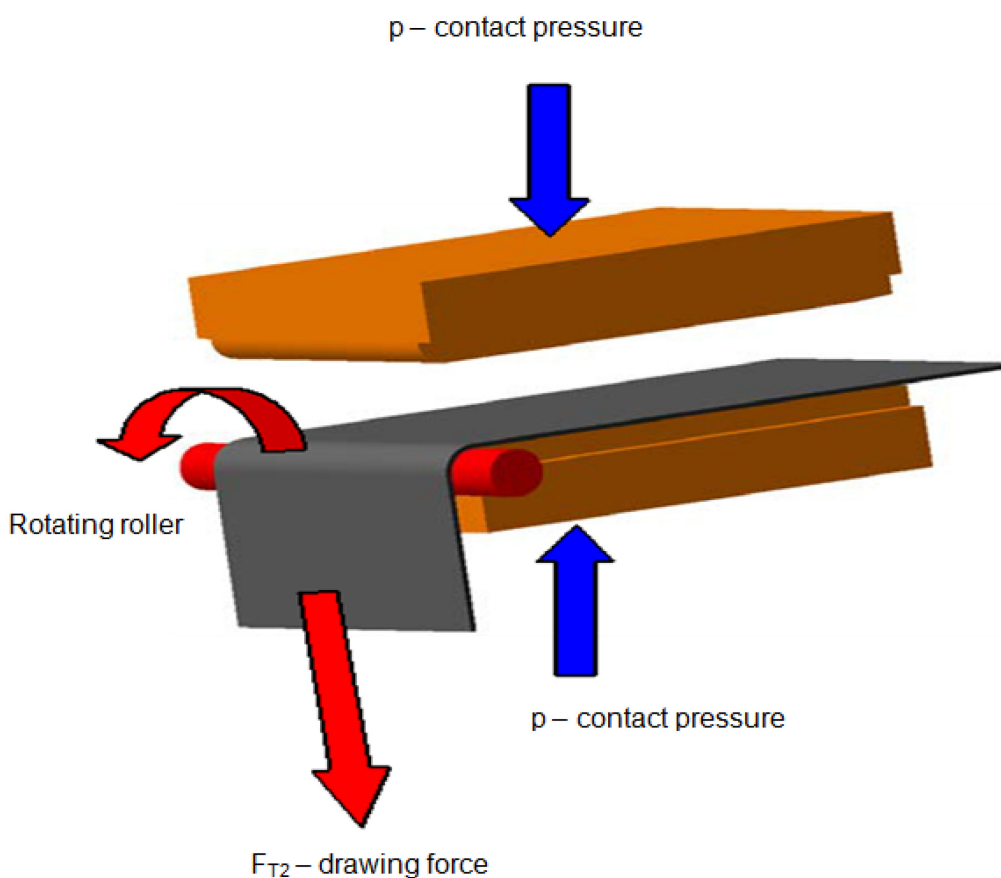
Strip drawing test – simulation of bending force on the drawing edge
